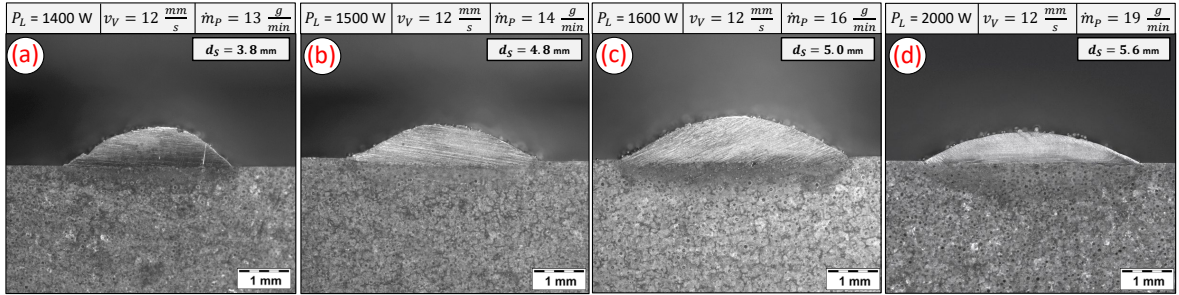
(a) Single weld track with $d_S = 3.8$ mm; (b) single weld track with $d_S = 4.8$ mm; (c) single weld track with $d_S = 5.0$ mm; (d) single weld track with $d_S = 5.6$ mm
